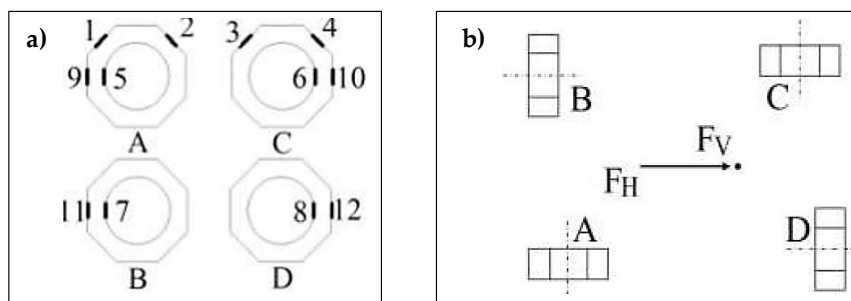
Strain gauge based measuring system for stir welding to detect two force components: a) Position of the strain gauges on the octagonal rings, b) Position and orientation of the octagonal rings on the welding plate, adapted from [35]
